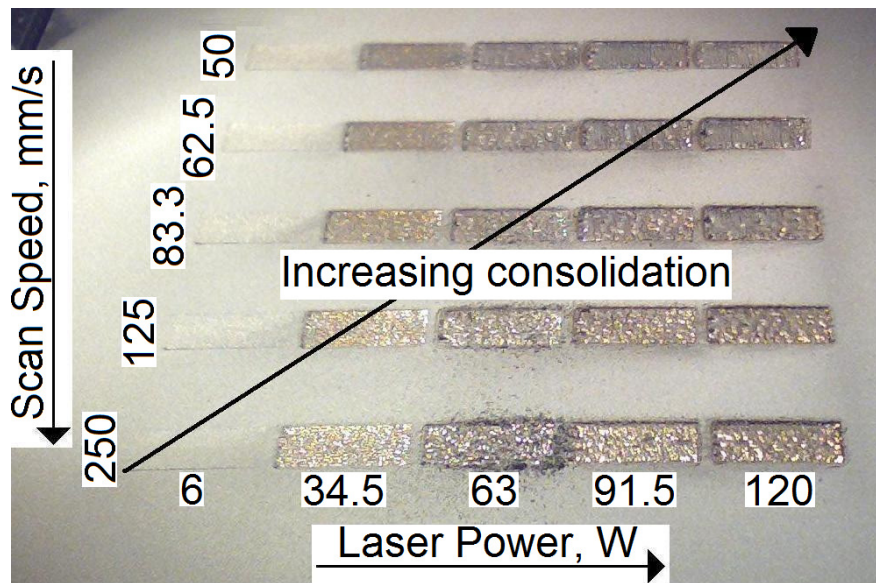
Photograph of SLM fabrication of single layer 316L stainless steel samples.
